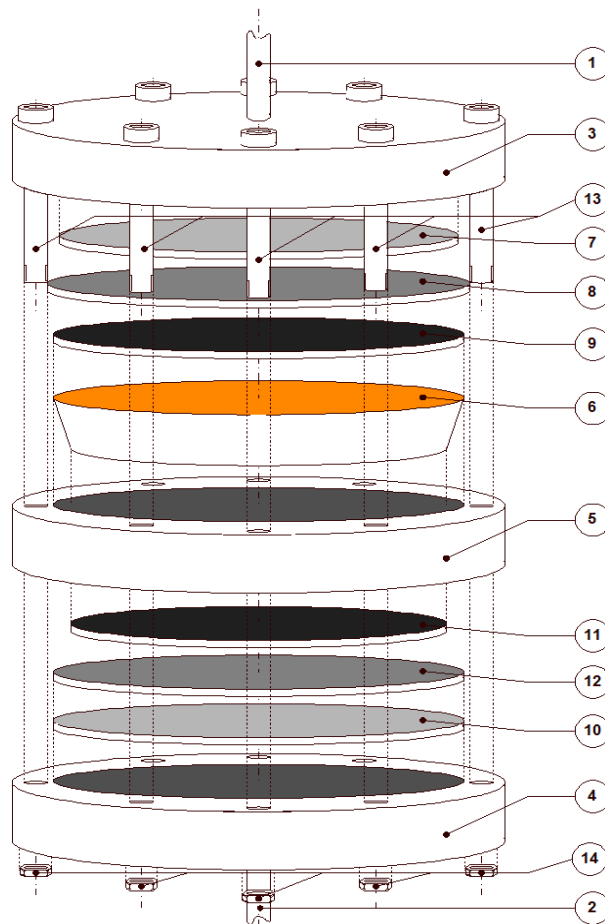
Exploded view capillary pressure, sample holder pressure cell.
